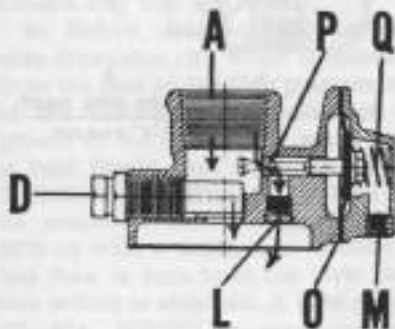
Sectional view of economizer used on Ensign model Xg carburetor.
